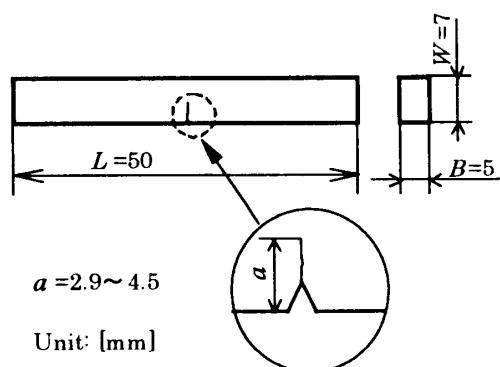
Specimen configuration and dimensions (Cracked Specimen)
